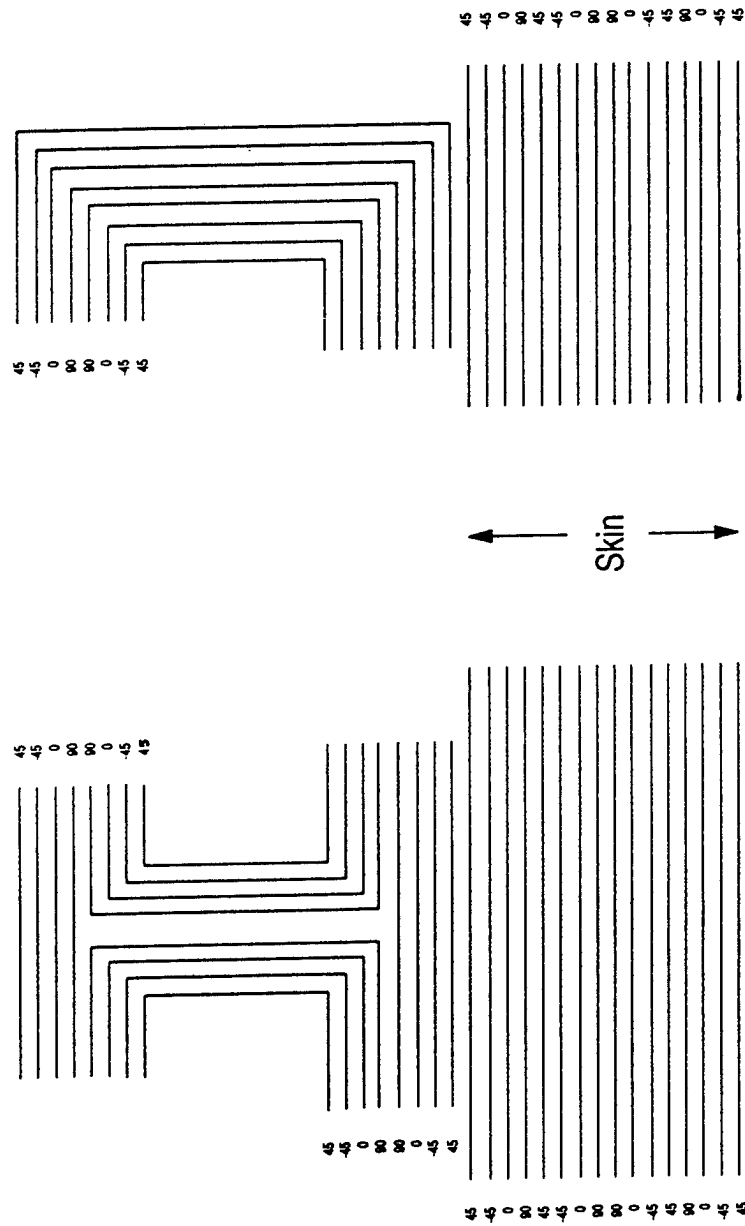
Specimen layout: The layout for the channel section and I-section specimens is shown schematically.
